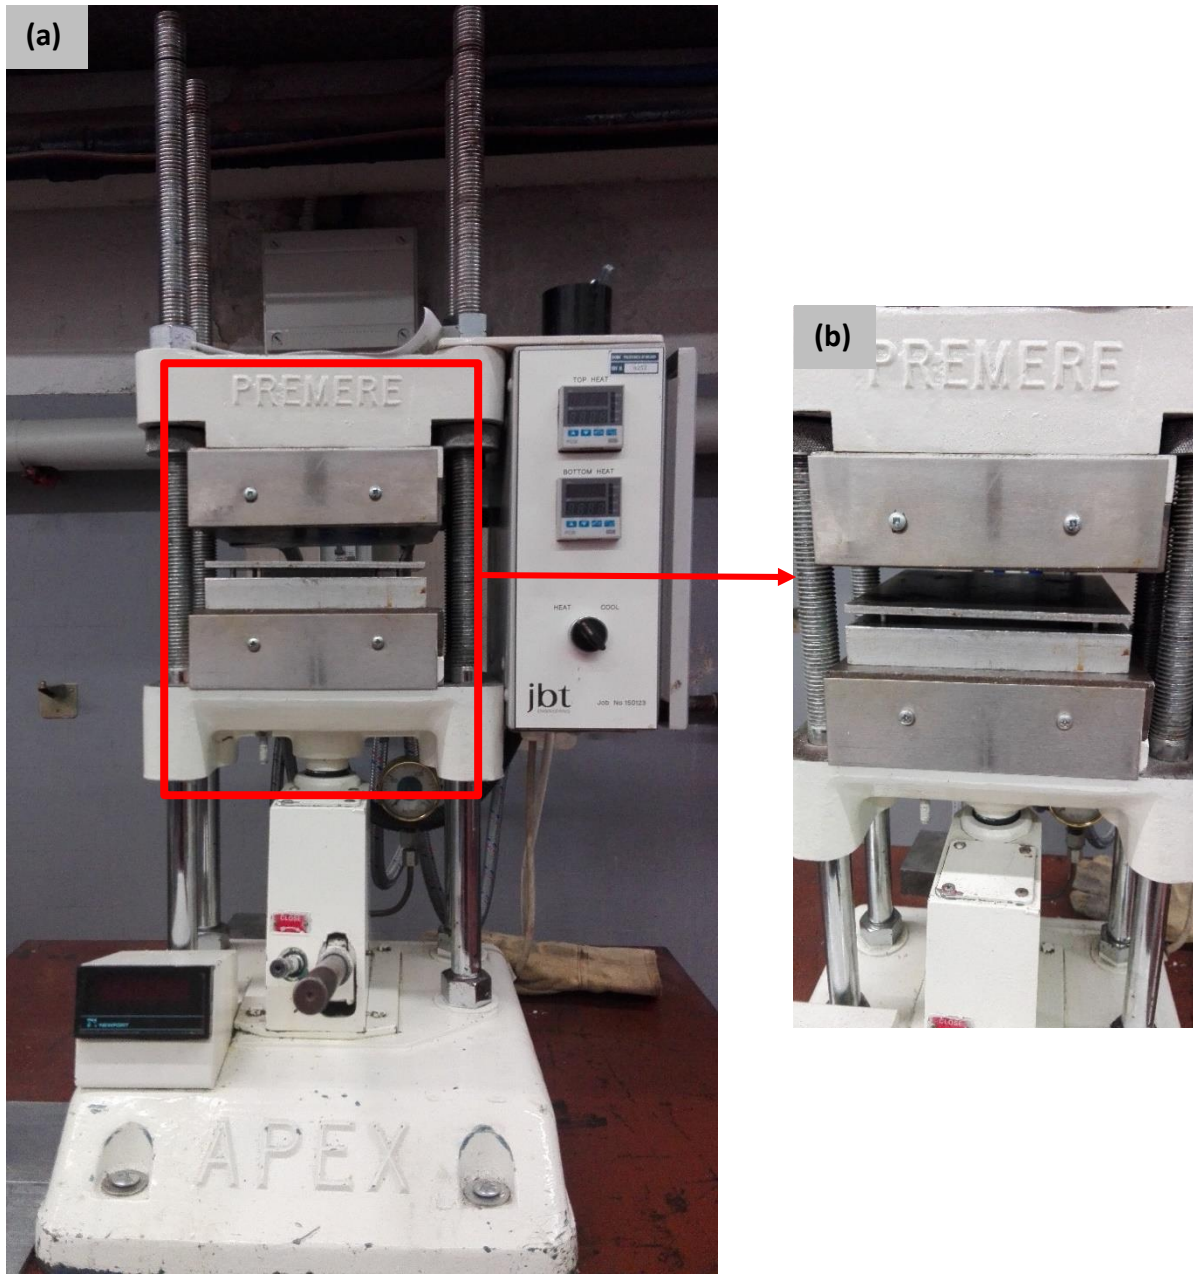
1: (a) Hot molding press (b) close-up of the mold placed between the hot plates of the molding press
